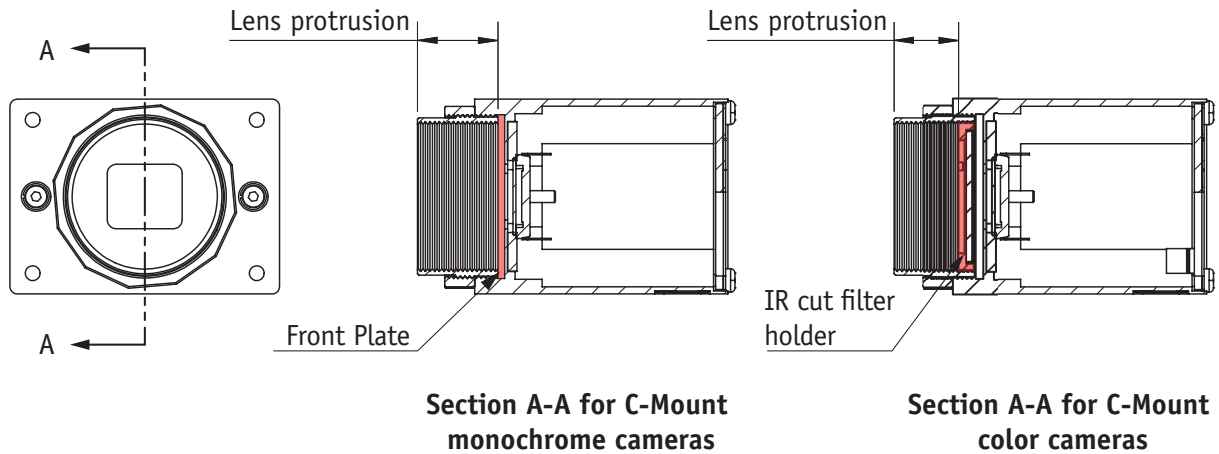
Cross section of typical Prosilica GC assembly with C-Mount
